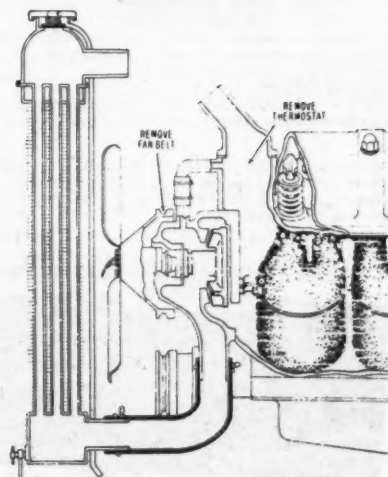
Combustion leakage test of cooling system. Air bubbles in engine outlet with engine running confirms this
